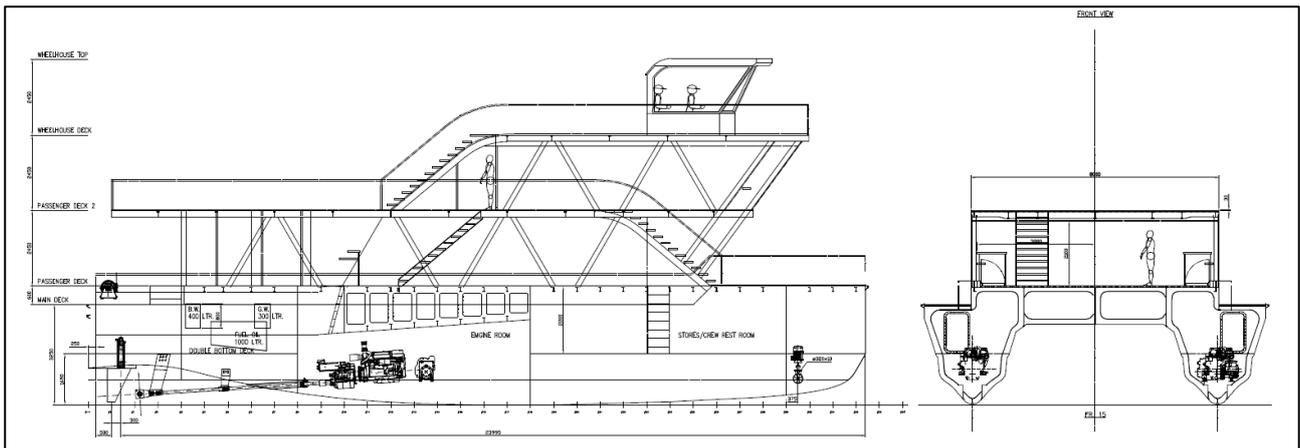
GA drawing of the vessel. Technical drawing: The shipyard
